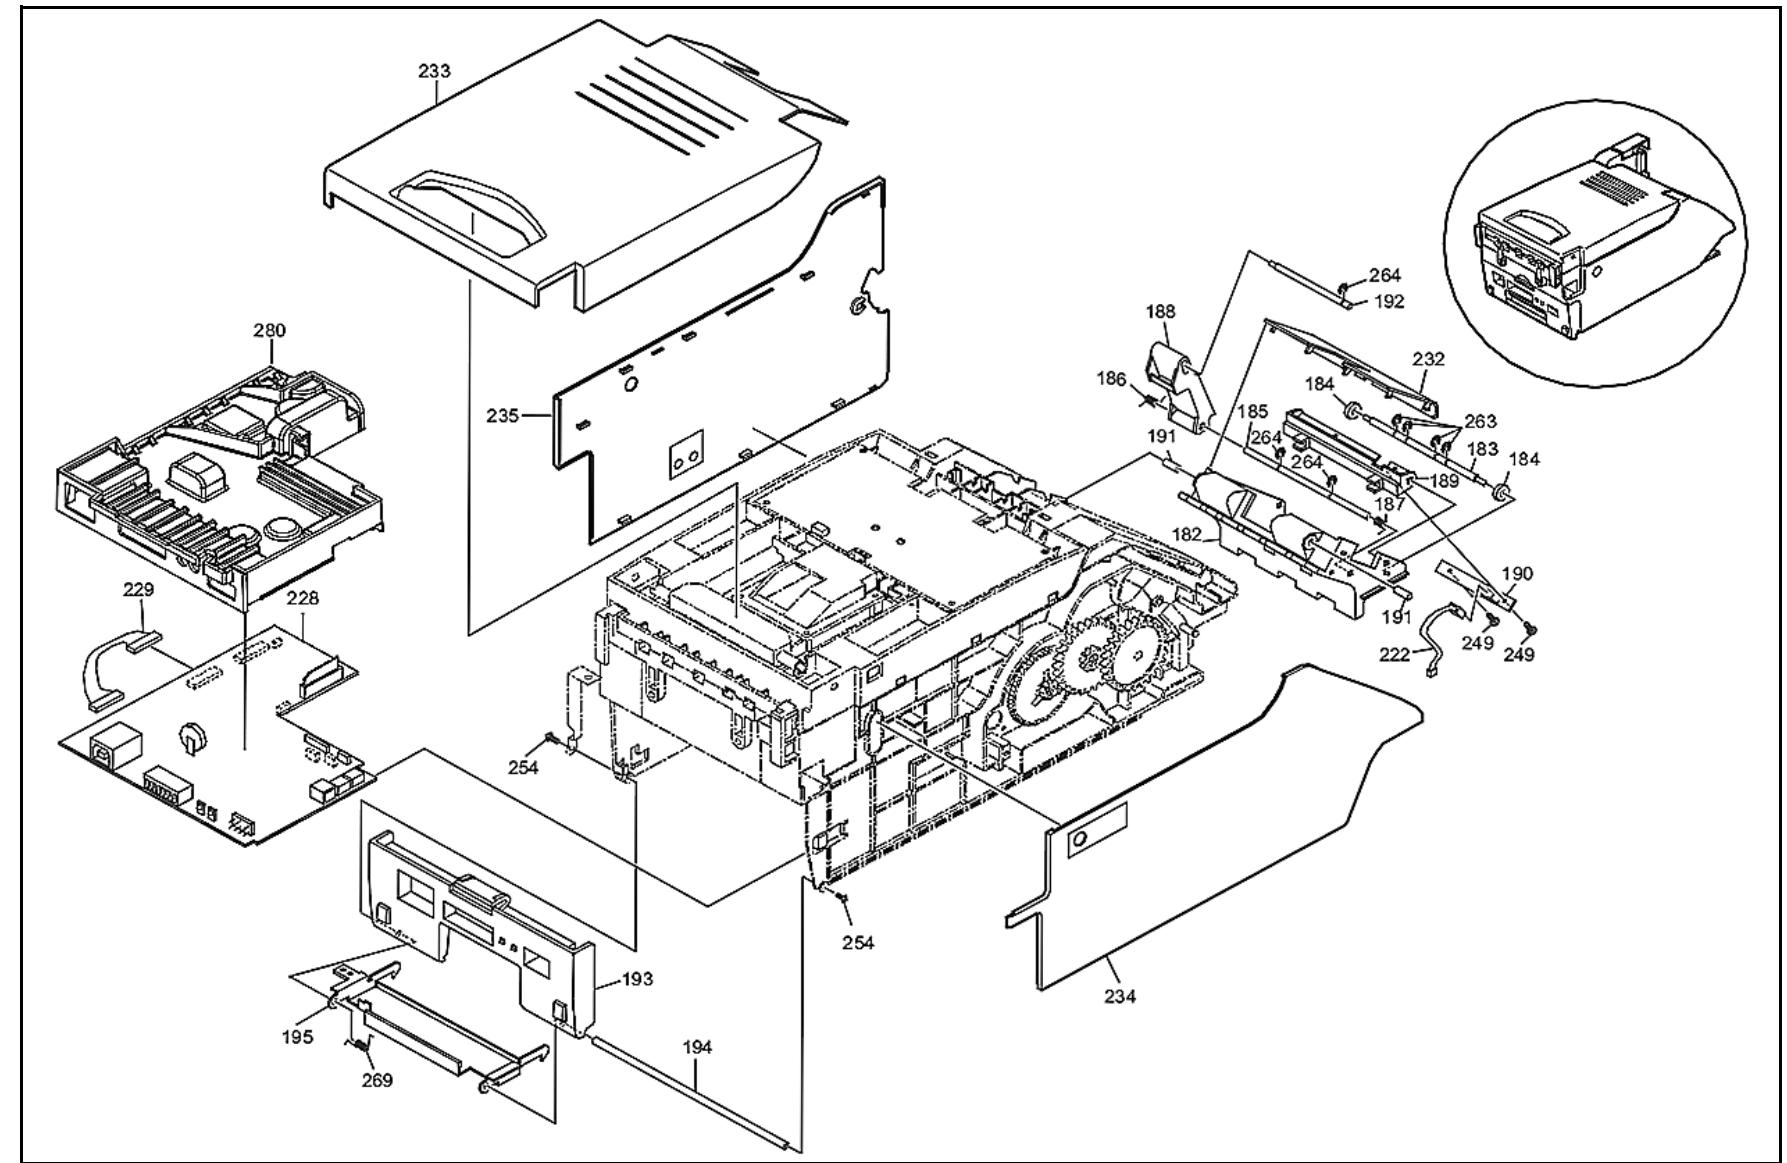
UBA Transport Unit Exploded View (Part 2)
